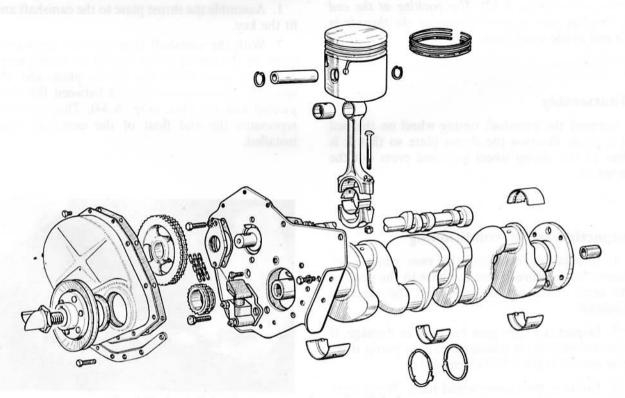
Crankshaft, piston, connecting rod and timing gear components
